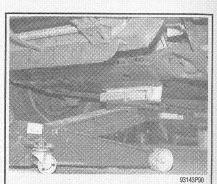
Place a piece of wood on the jack to protect the oil pan and jack up the engine about 4 or 5 inches
